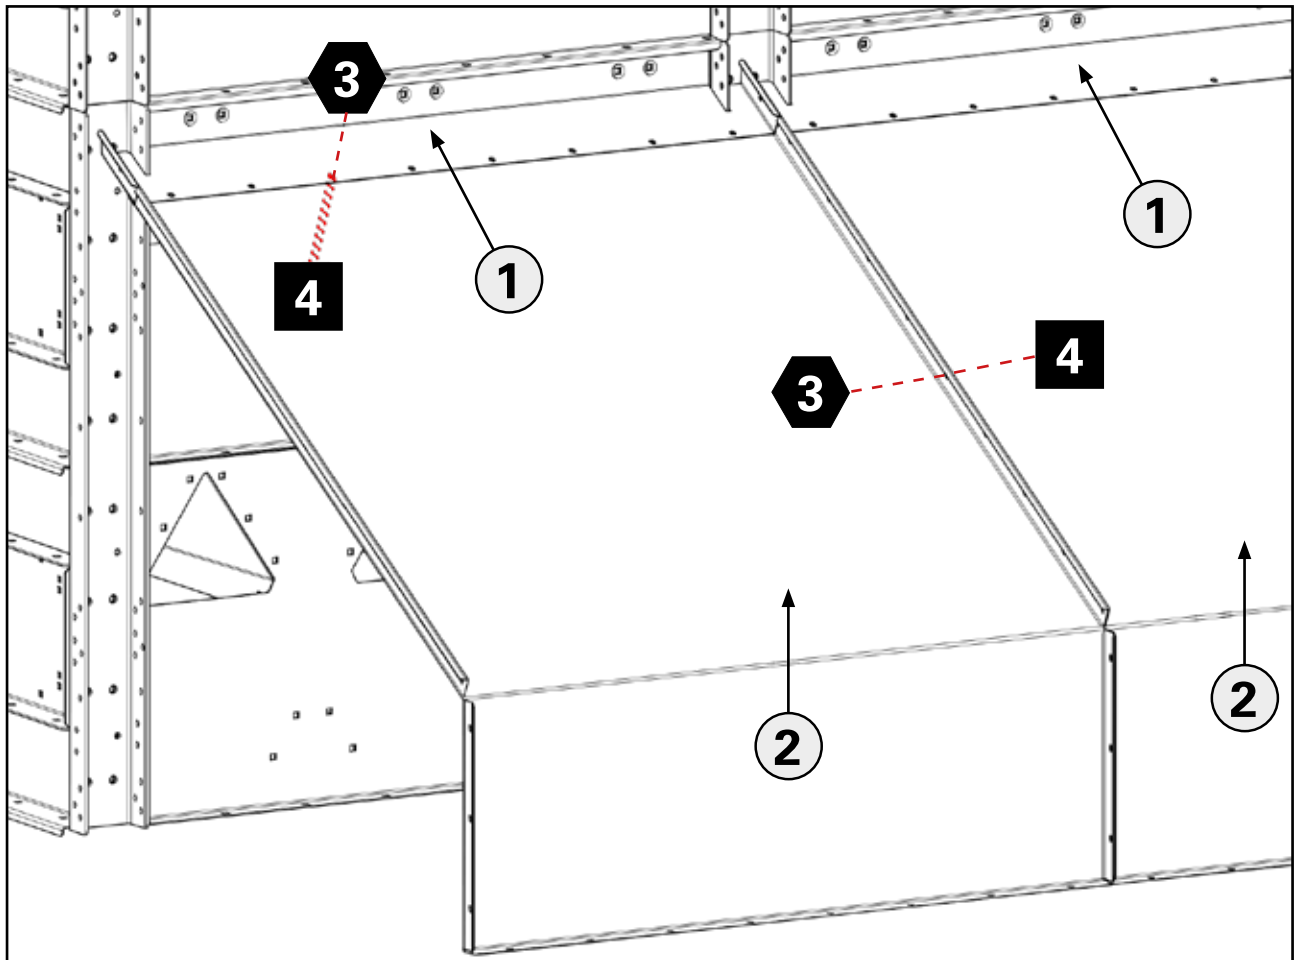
Attaching the top air casing panels to the top air casing bracing
